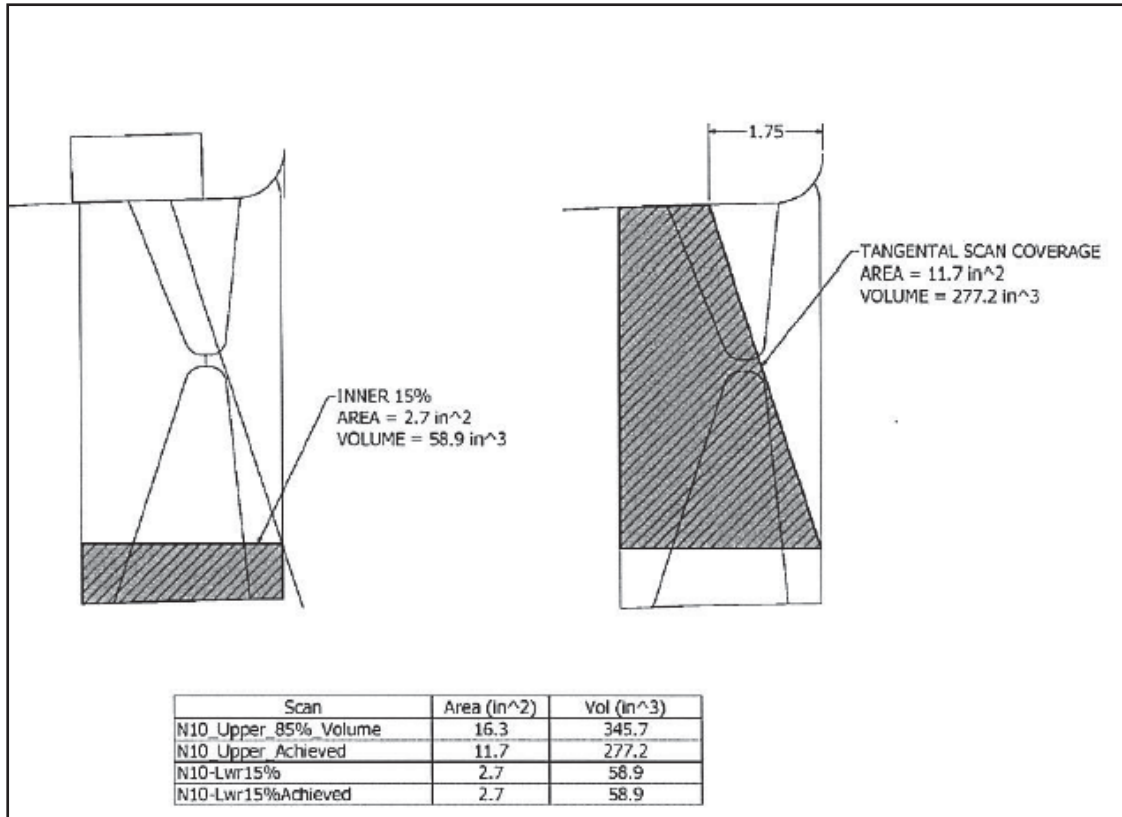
Weld N10-NV, Upper 85% & Lower 15% Achieved Tangential Coverage
